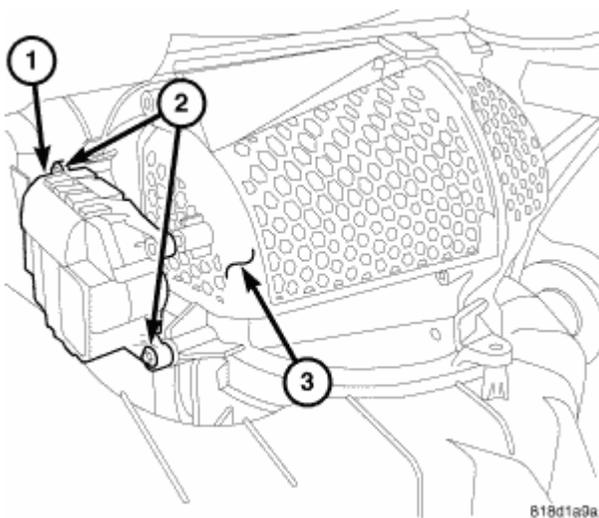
Recirculation Door Actuator, Screws & Air Inlet Housing
